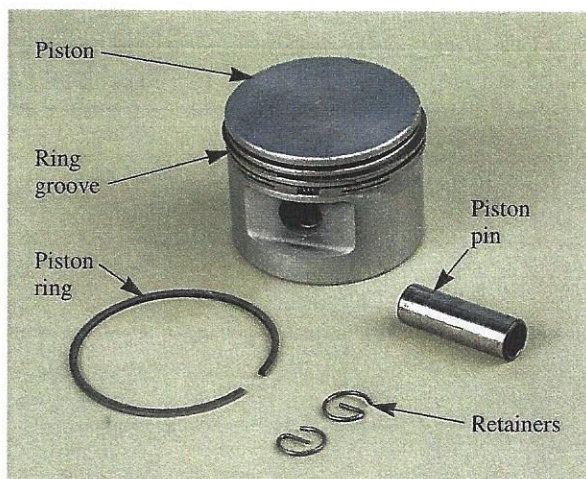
The piston is the largest sliding-reciprocating part in engine. Piston rings seal combustion chamber from crankcase and must fit properly.
